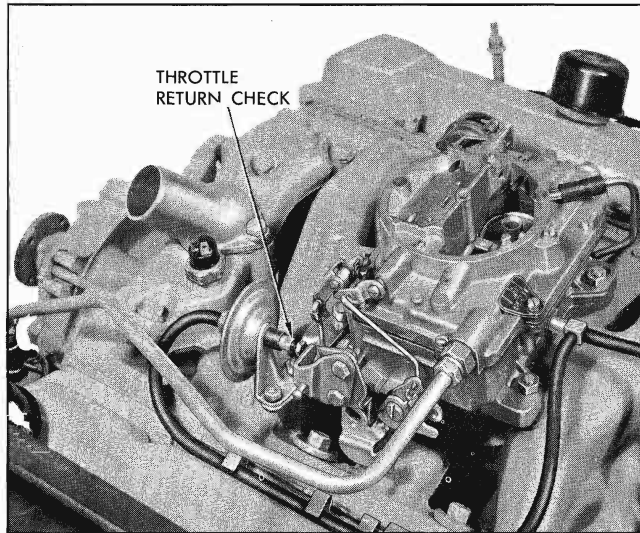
B-101 Throttle Return Check Hook-up for Hydra-Matic Four Barrel Carburetor (Same Hook-up for Two Barrel)
